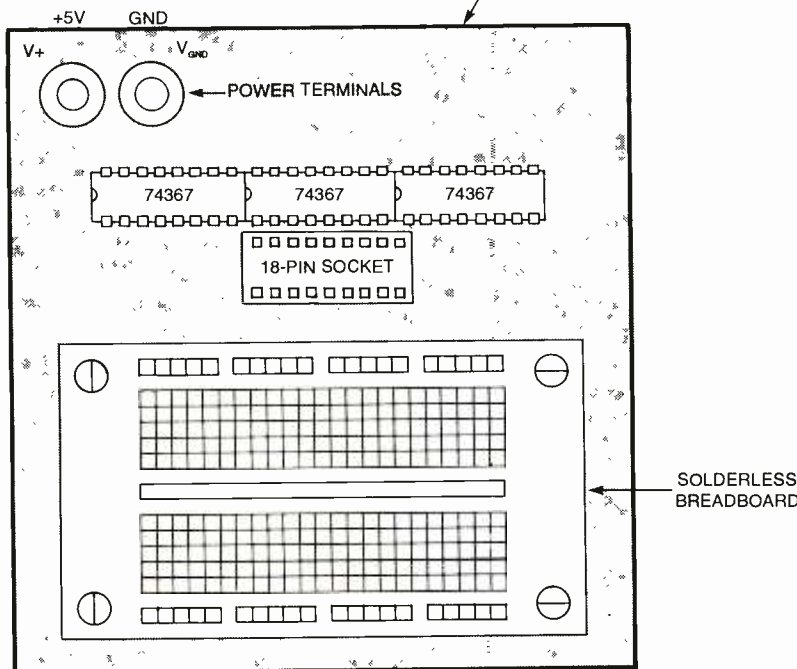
As shown here, the interface can be built on a section of perfboard with the smaller components wired to a solderless breadboard. This assembly scheme and layout allows maximum design flexibility.
